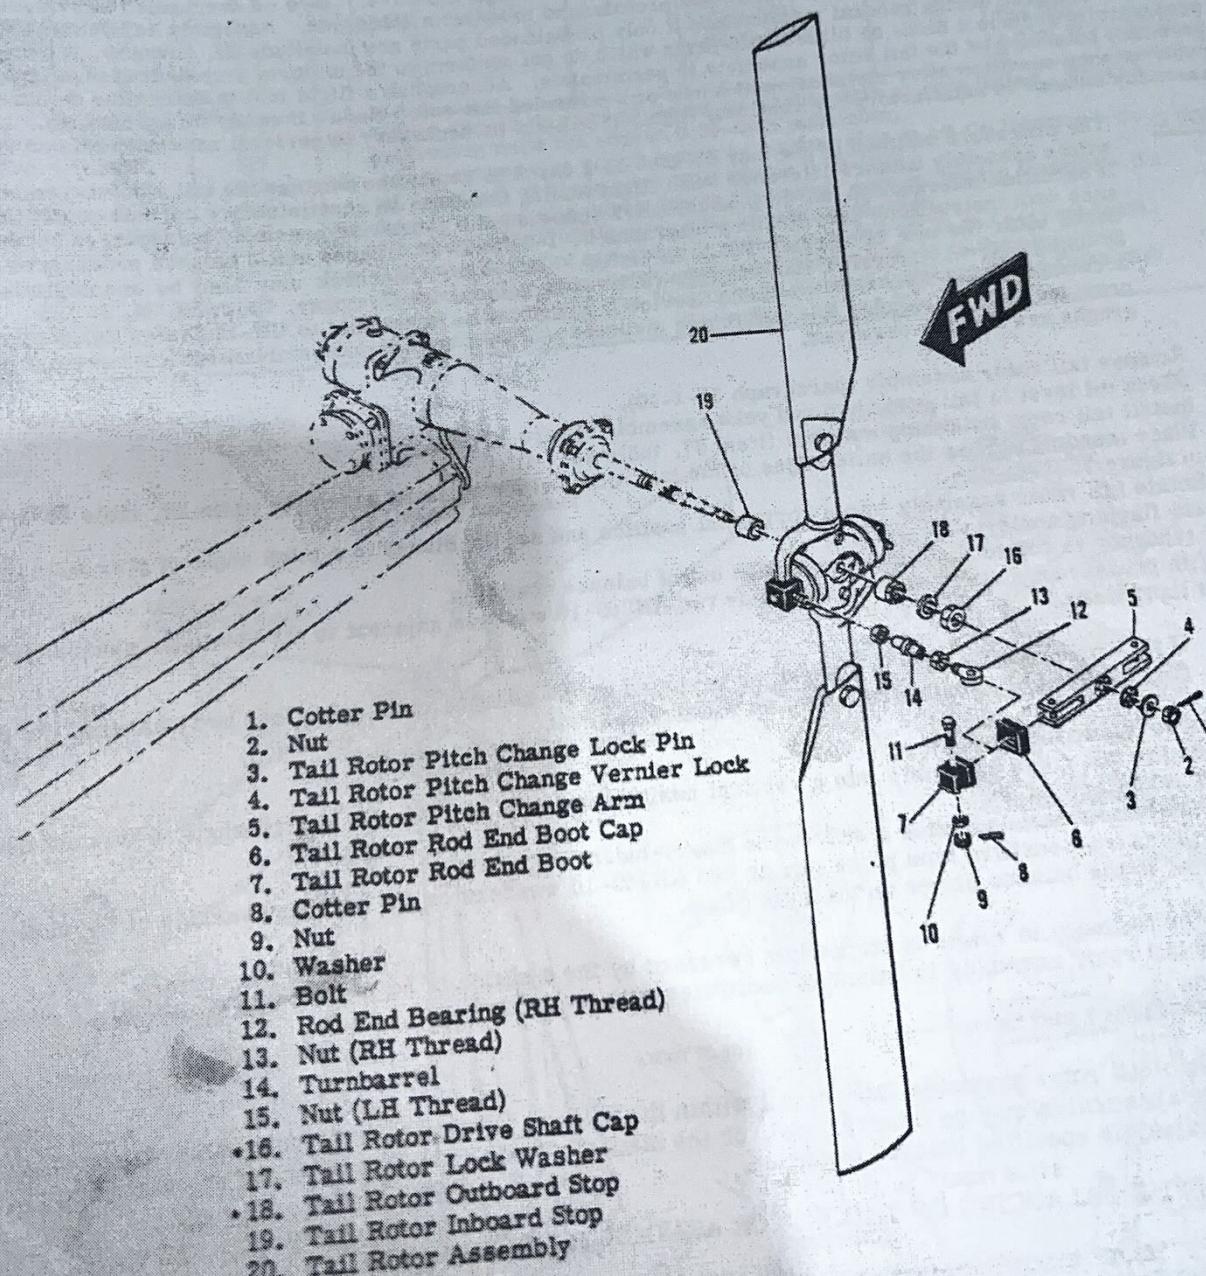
Tail Rotor Assembly and Pitch Change Mechanism
